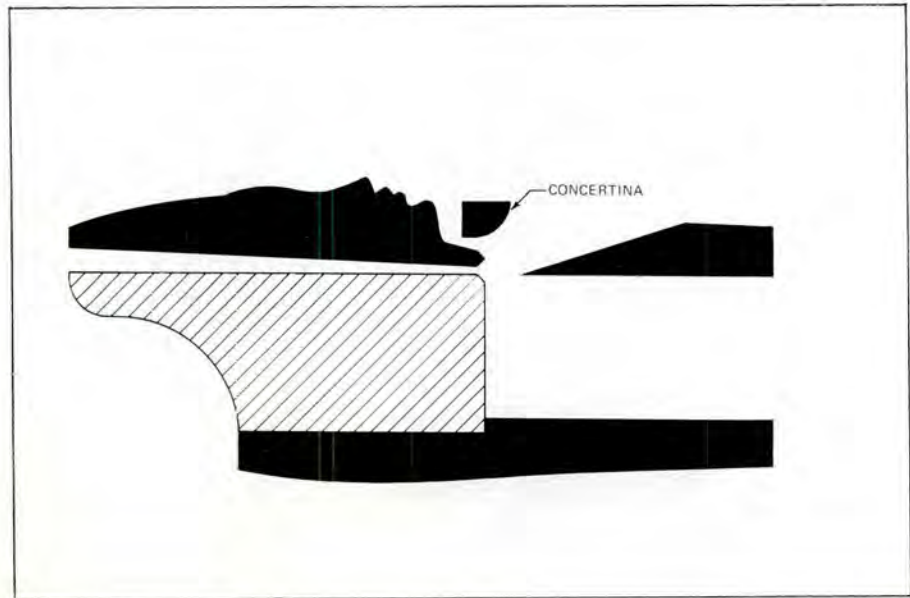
Detail in section of Figure 4, showing the nominal cap and separate bridge.
